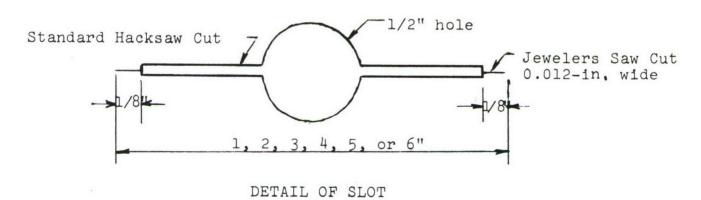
Center Slotted Fracture-Toughness Panels.
